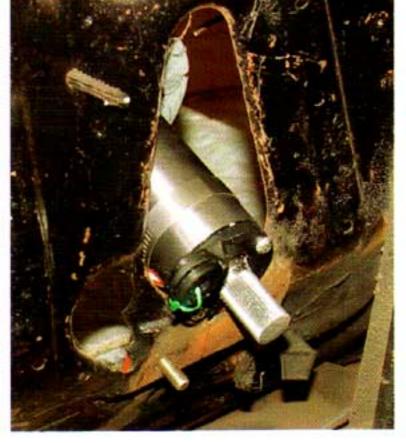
When the steering column is installed, the bottom of the column will be flush with the firewall. This allows clearance for a stock steering box, a 605 or 670 power steering box.
